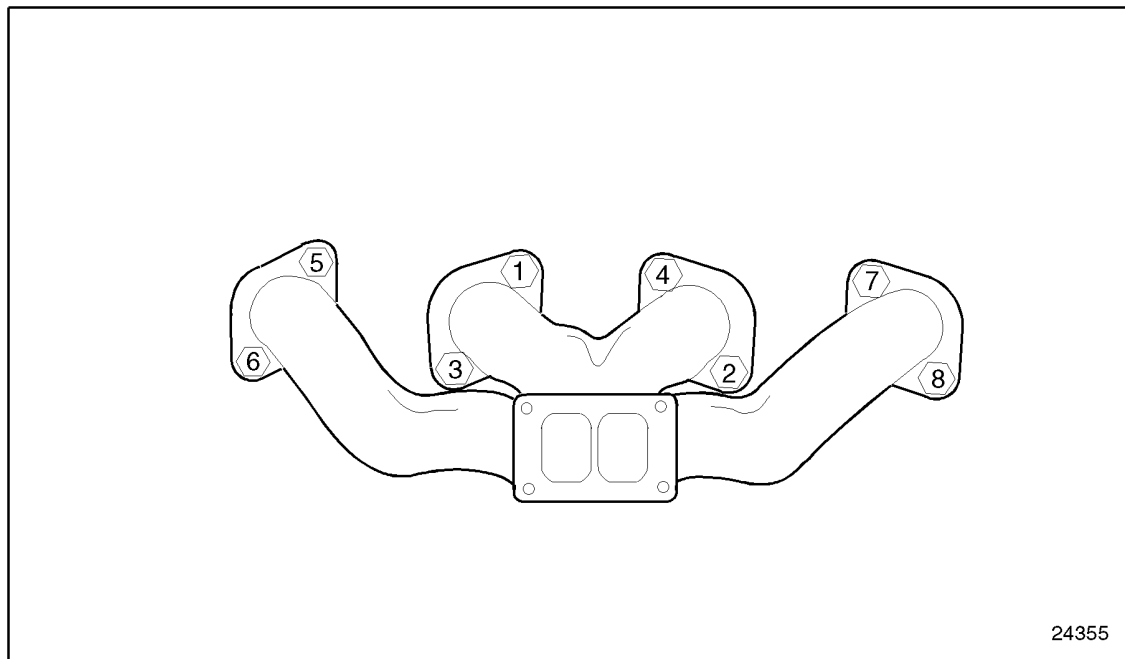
Exhaust Manifold Bolt Tightening Sequence
